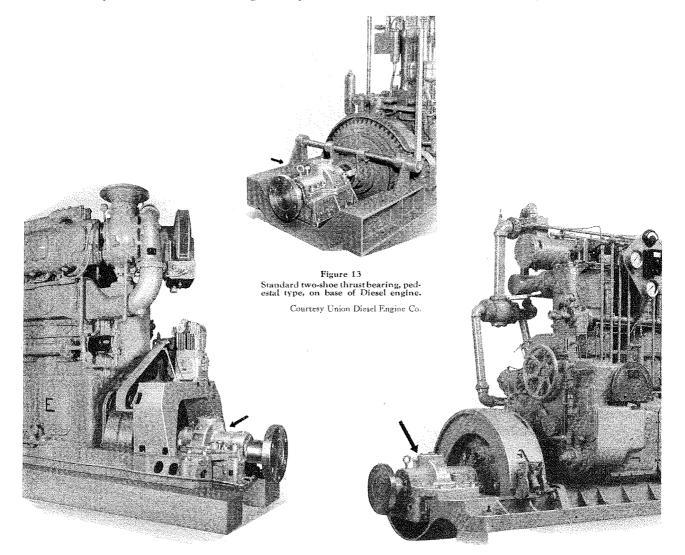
Special two-shoe high-flange thrust bearing on base of Diesel engine. Courtesy Enterprise Division, General Metals Corp.
